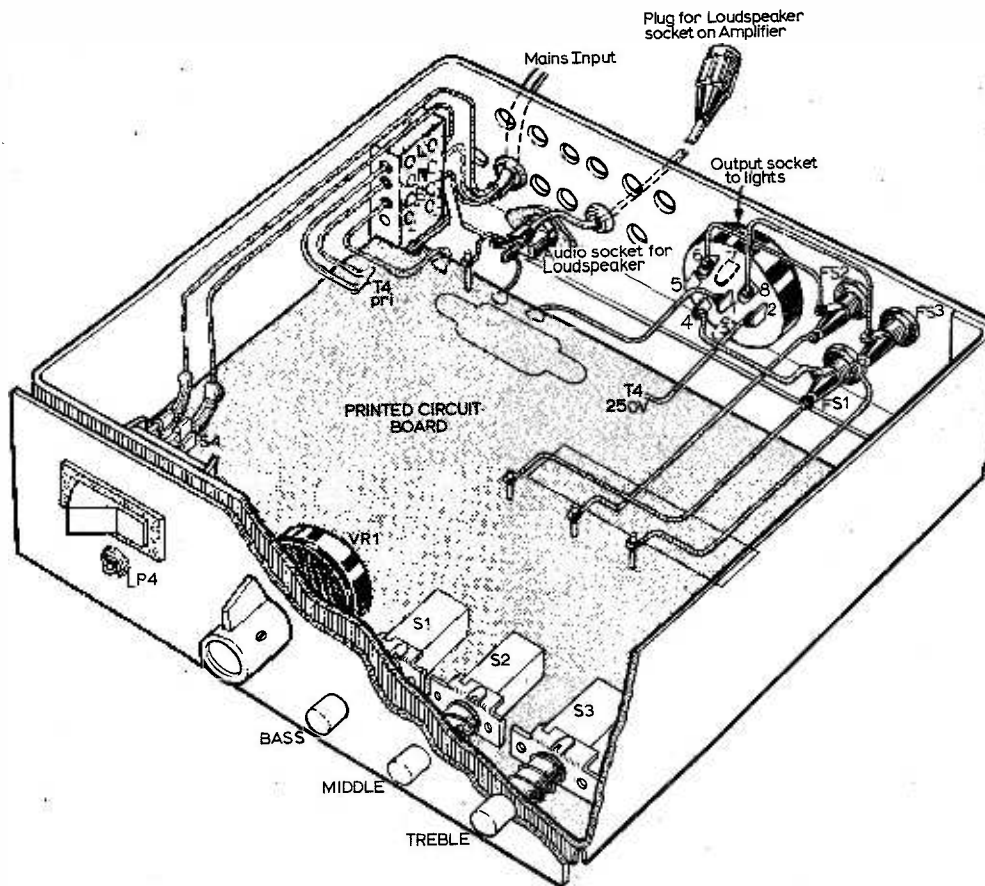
Wiring of chassis mounted components to the printed circuit board. Tag 1 on the lights output socket goes to chassis (and mains earth). The live lead (L) from the mains terminal block goes to the 250V tag on T4 transformer.
